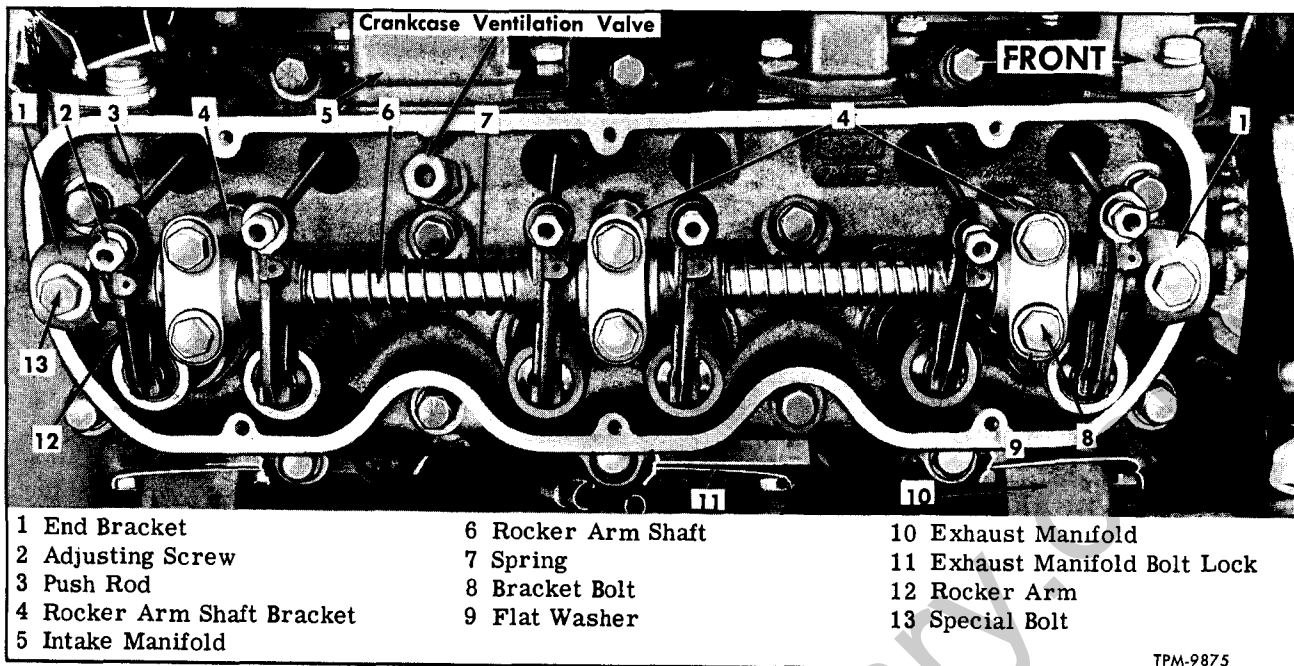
Valve Rocker Arms and Shaft Assembly Installed on V6 Engine
